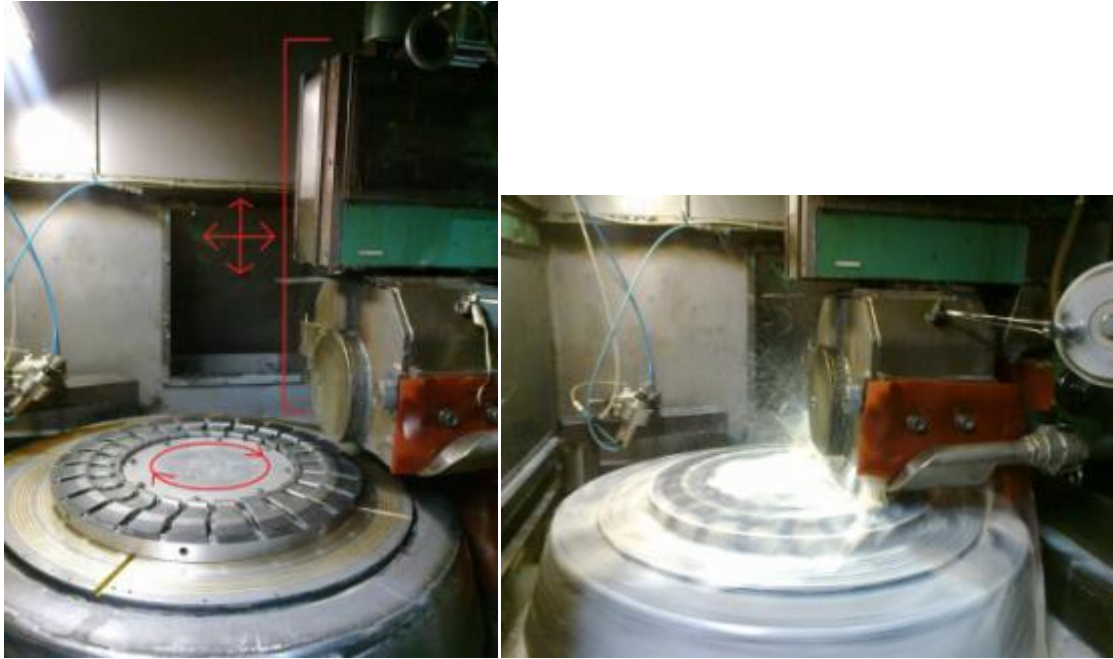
A stand-by grinding machine used for grinding the smallest blades (Photograph Henrik Lund, Fiskars 2011)
